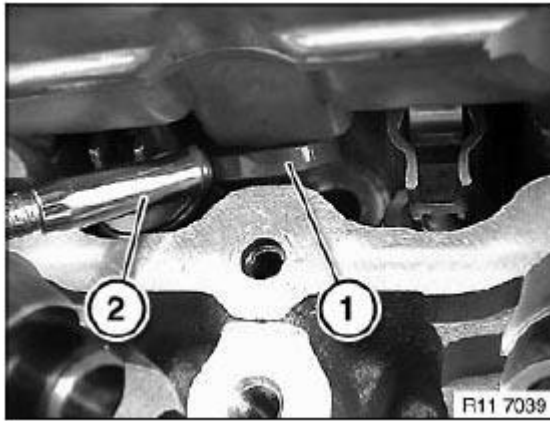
Removing Cylinder Head Bolts Shims With Magnet
